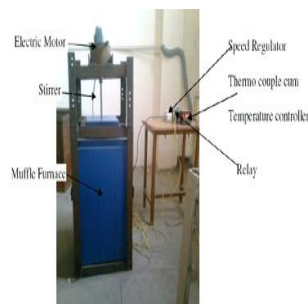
Experimental Set-up of Mechanical Stir Casting Process
